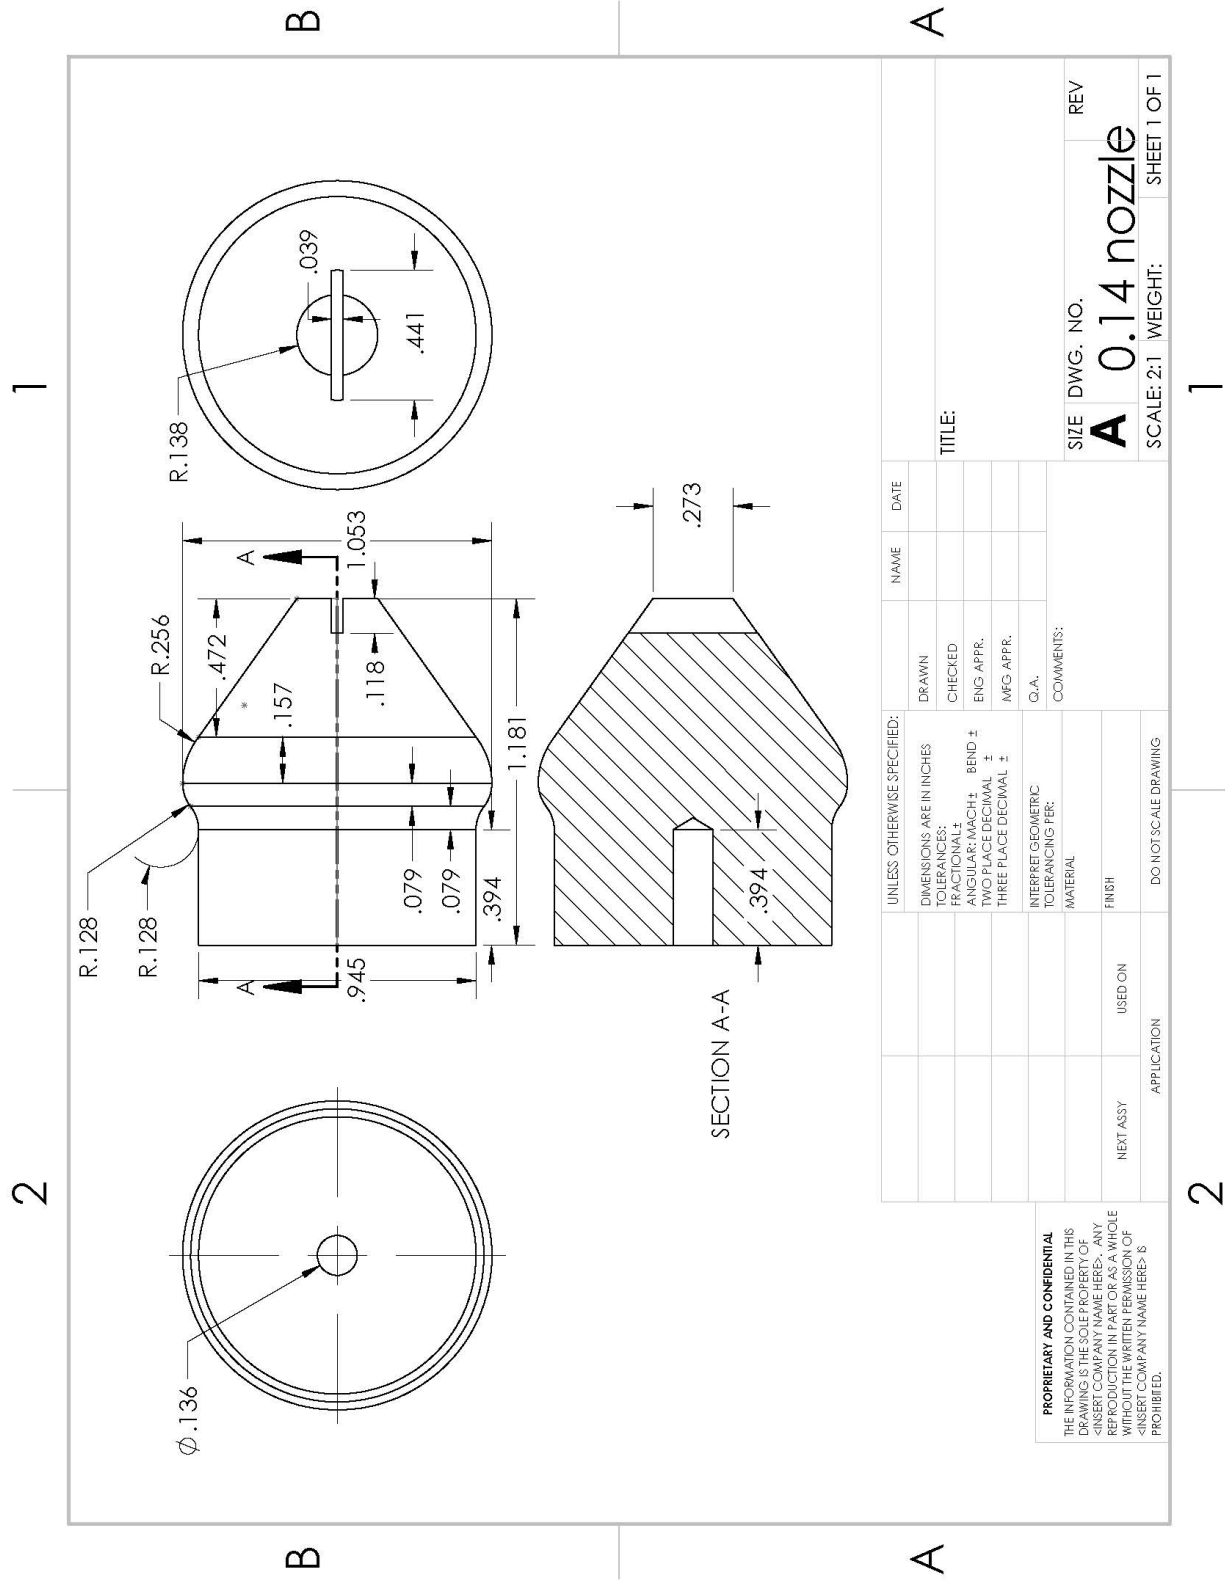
Machine shop drawing for the  $\epsilon = 0.14$  nozzle
